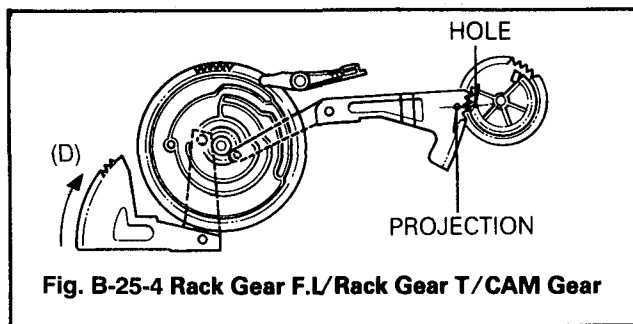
Rack Gear F.L/Rack Gear T/CAM Gear
